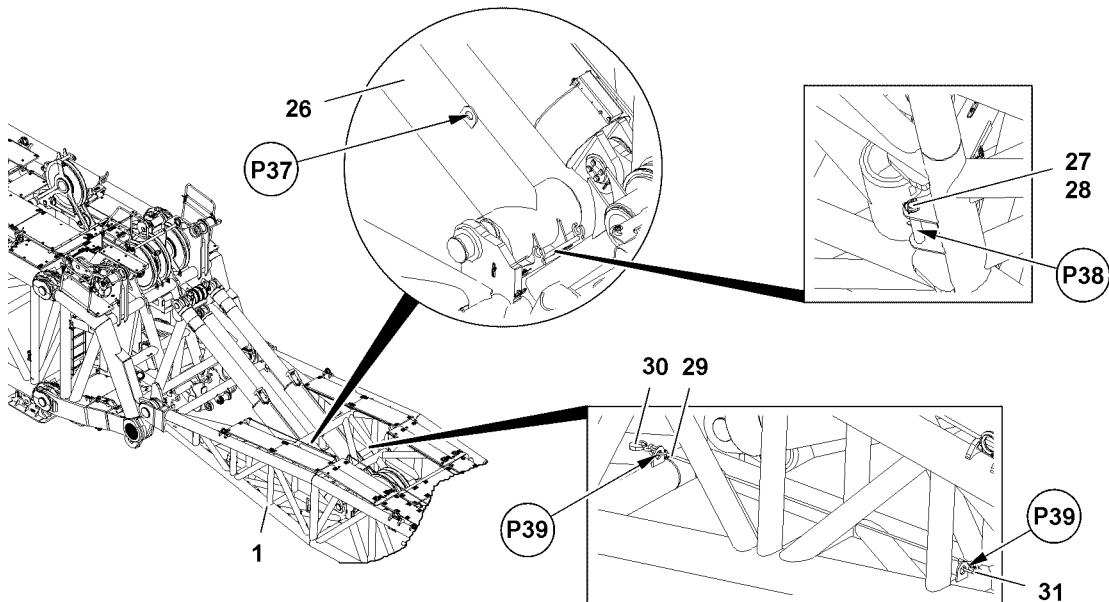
Disassembling WA-frame 1 on the end section — Assembling the retaining rope in the park position
